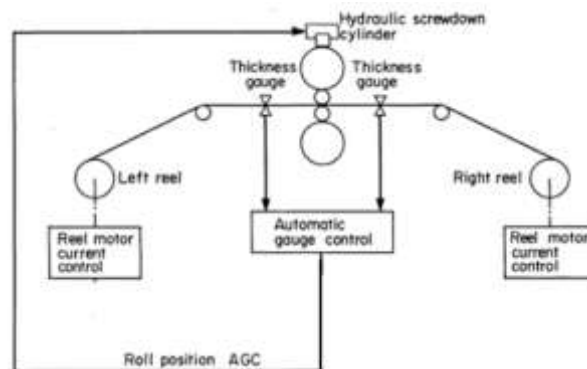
Schematic representation of Single stand 4 HI reversing cold rolling mill
